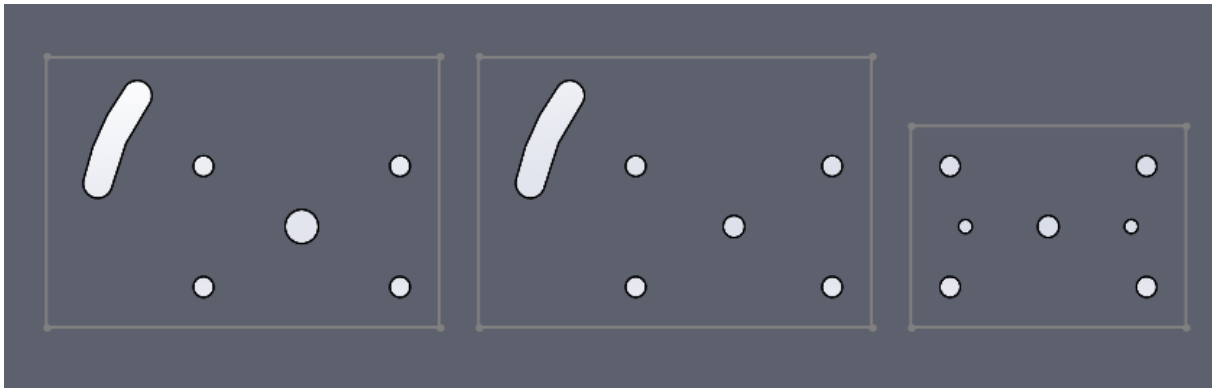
8 SolidWorks Drawing for CNC Machine-2.
